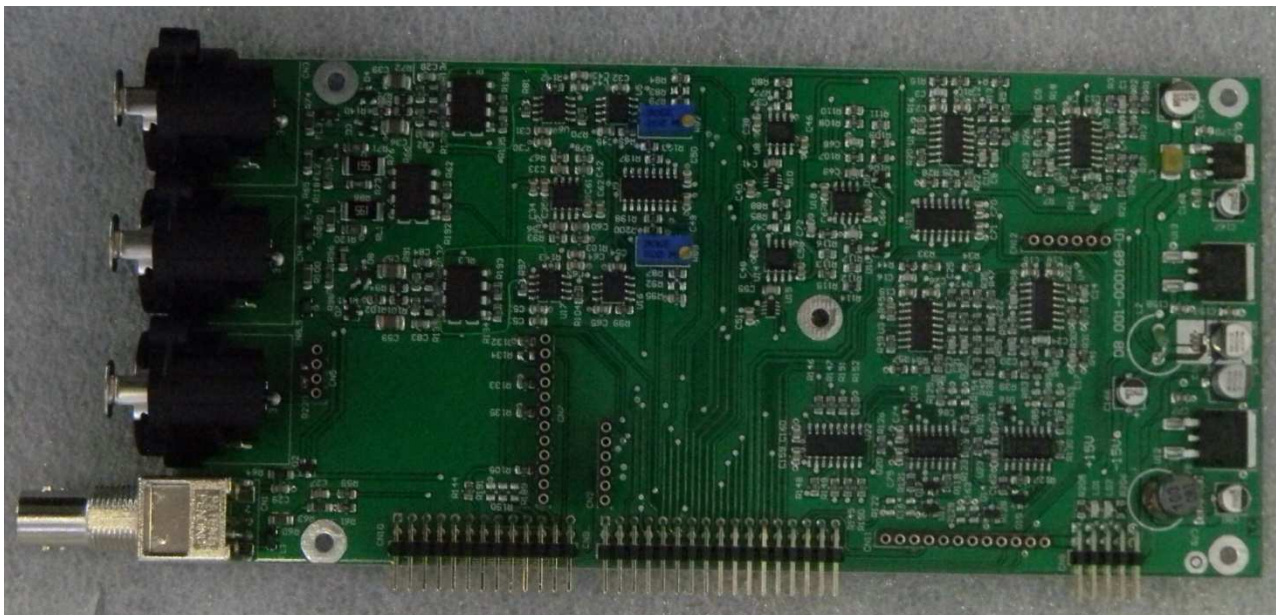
LEFT AND RIGHT BOARD REAR VIEW
